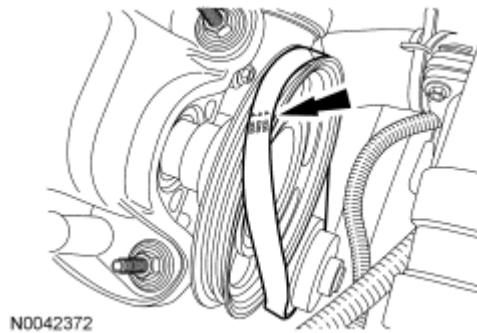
Locating Coolant Pump Belt On Coolant Pump Pulley
